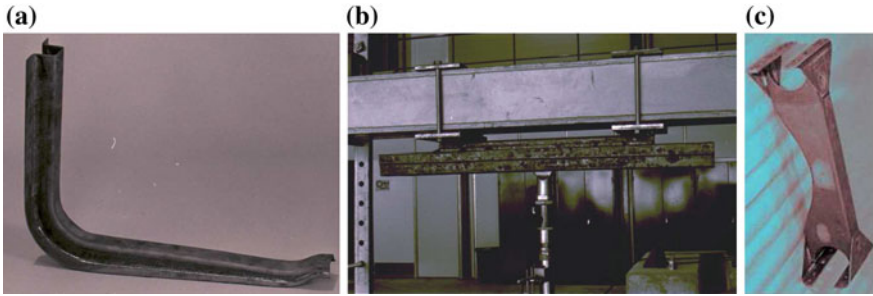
Volvo Trucks prototype parts: a gas tank bracket, b bumper beam under load test, and c cross member piece [4]
